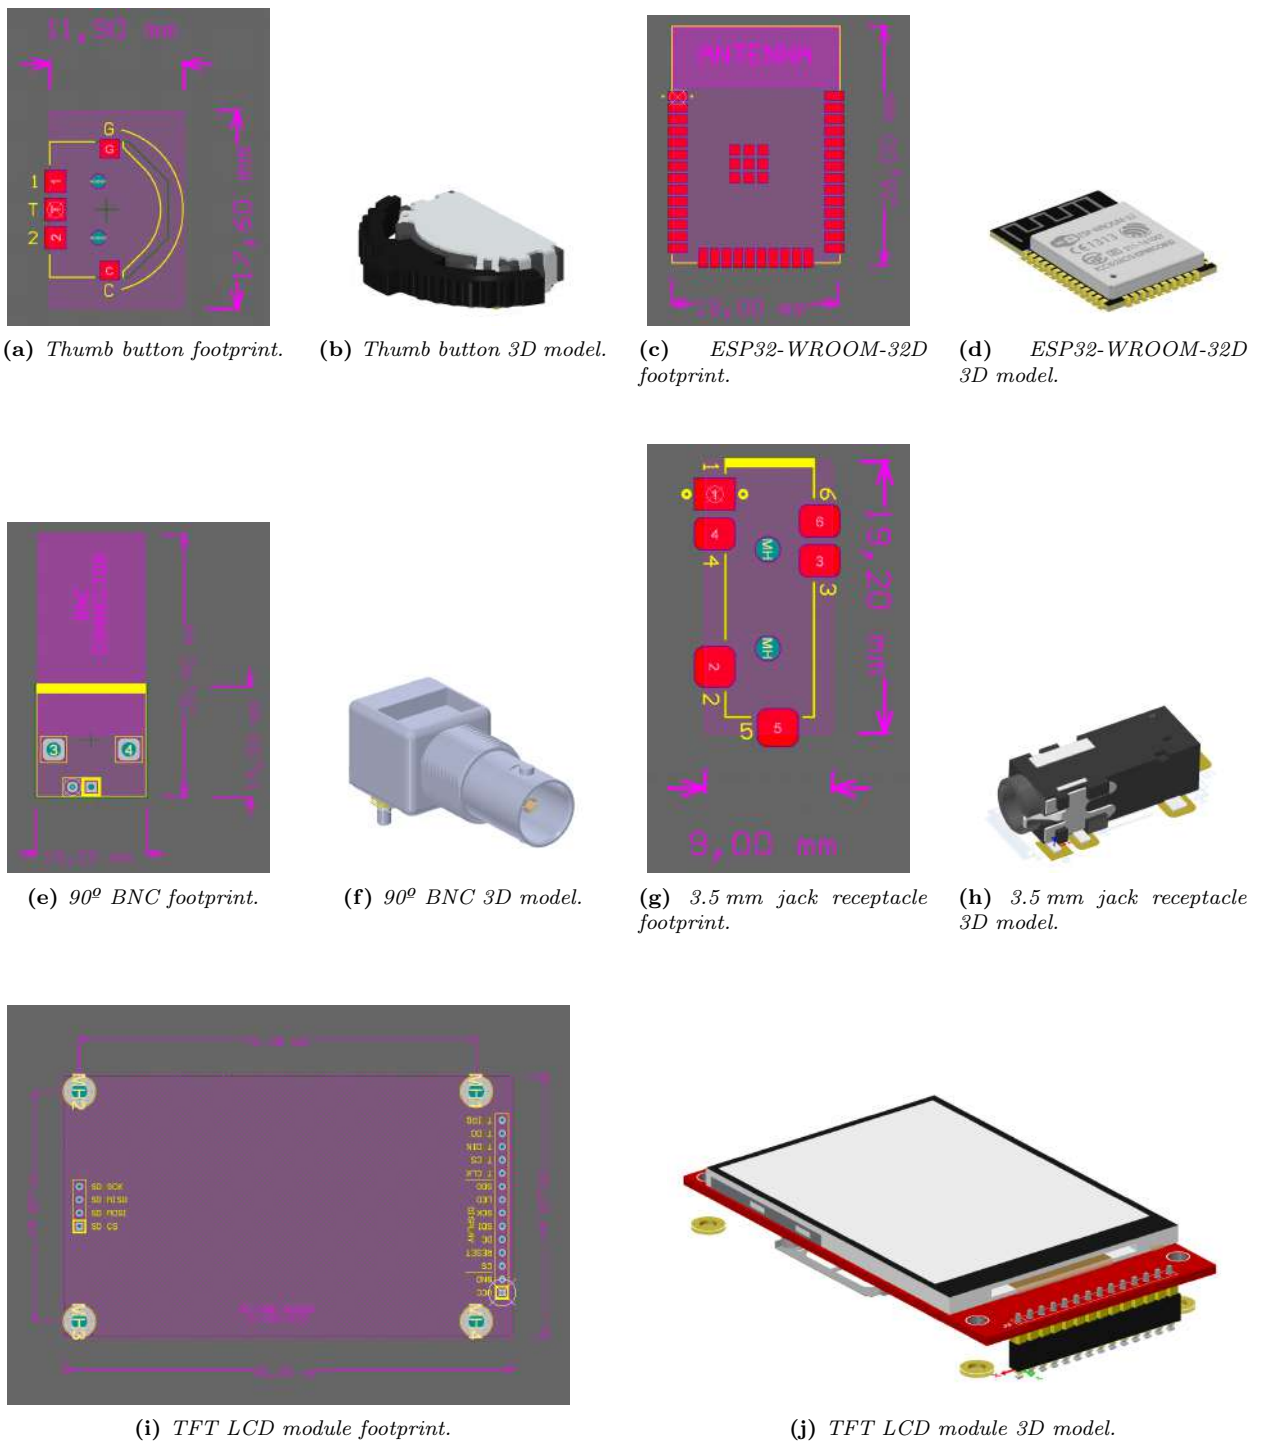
Footprints and 3D models of the different packages used in the PCB (part 3 of 3).
